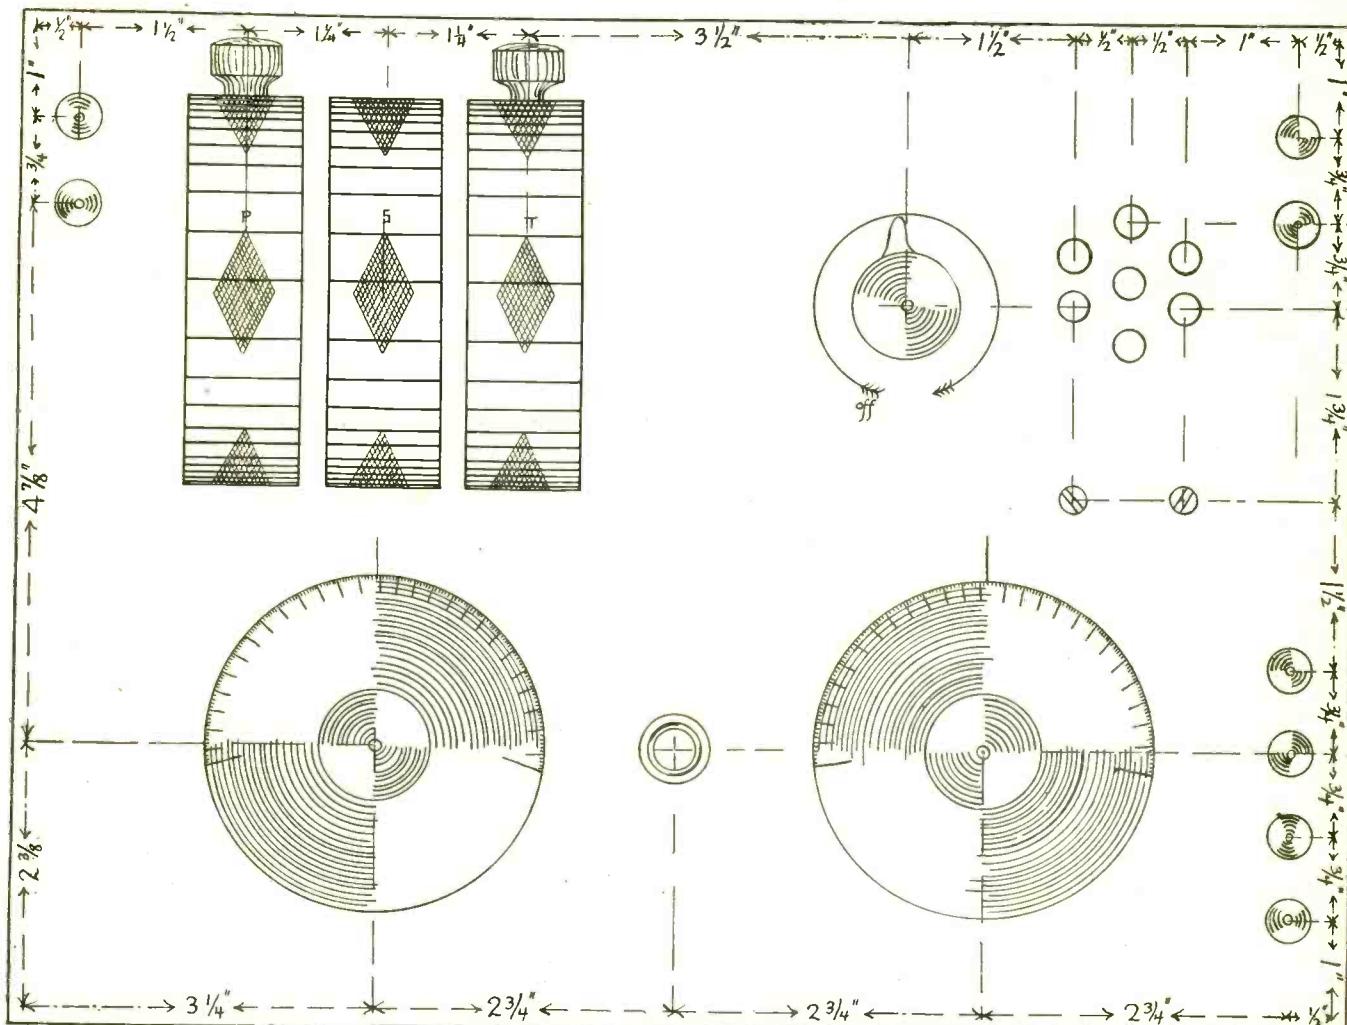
Front view of panel, with correct dimensions and proper layout, used in building Mr. Rumford's Universal All Weather Room.
